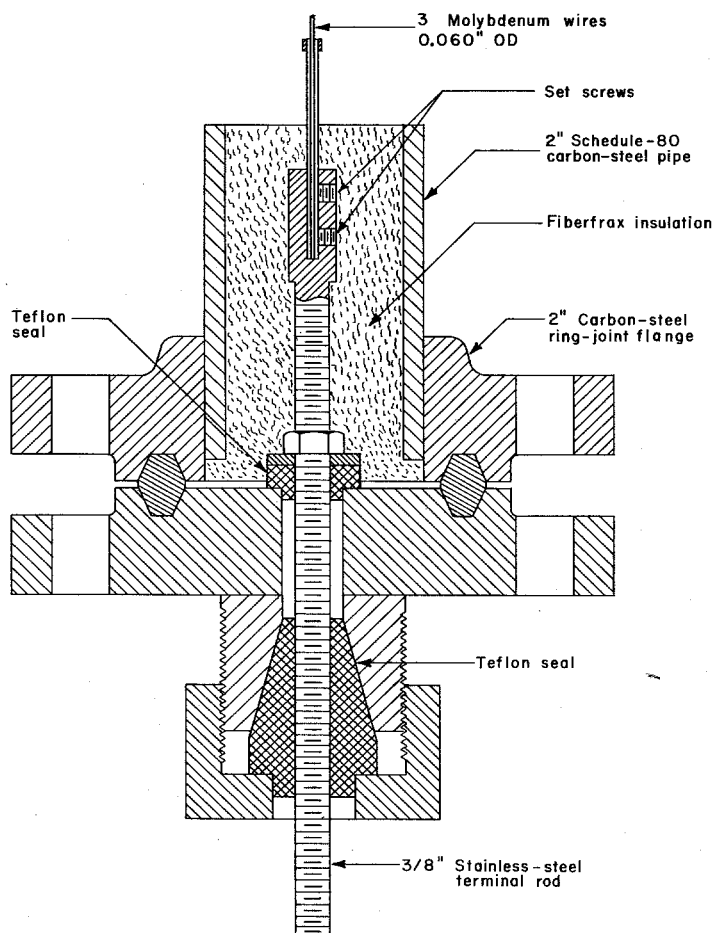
Seal for Terminal Rod of Helium Heater.
